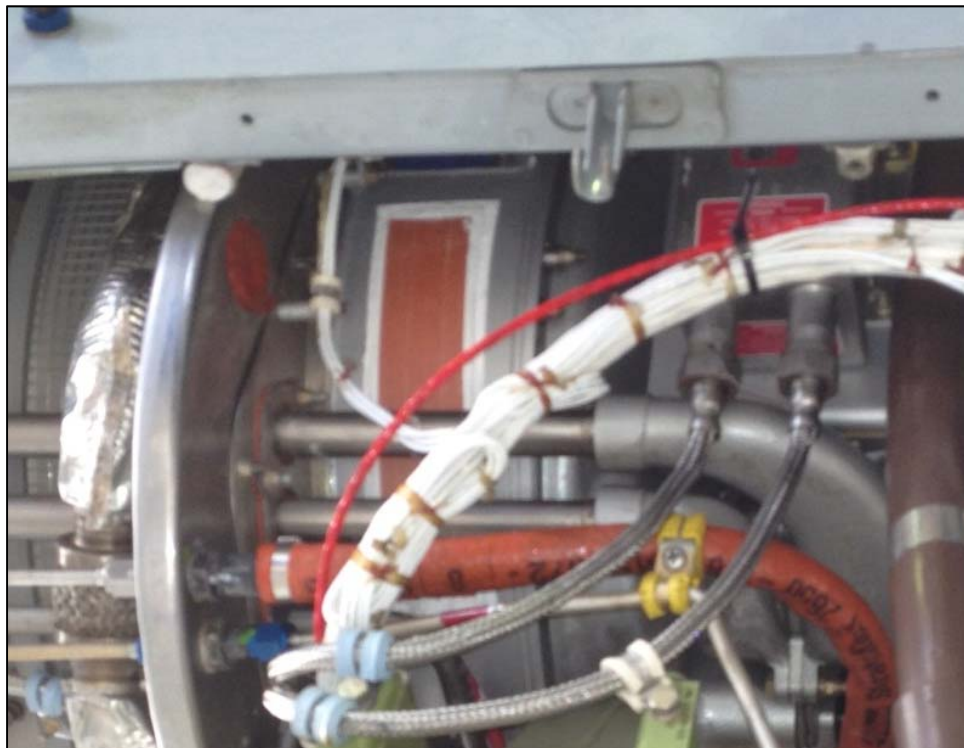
Engine LH AGB. Locate TEN3181-, pad element on left tank side accessory gearbox oil tank, lead down.
